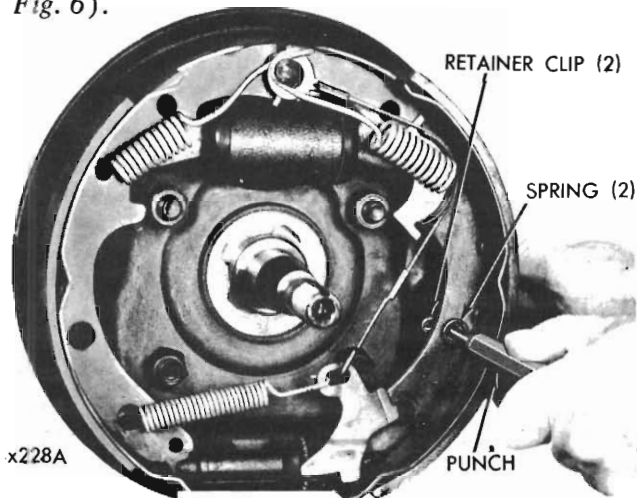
Removing or installing shoe retainer spring using Tool No. E5C20A (typical view of L.H. side).
